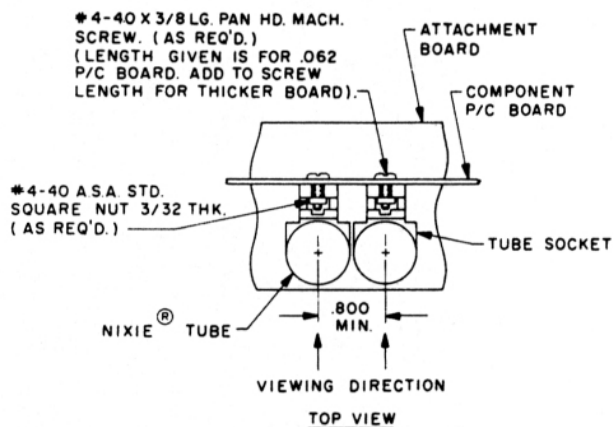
DRIVER MODULE BOARD SERIES MOUNTING
